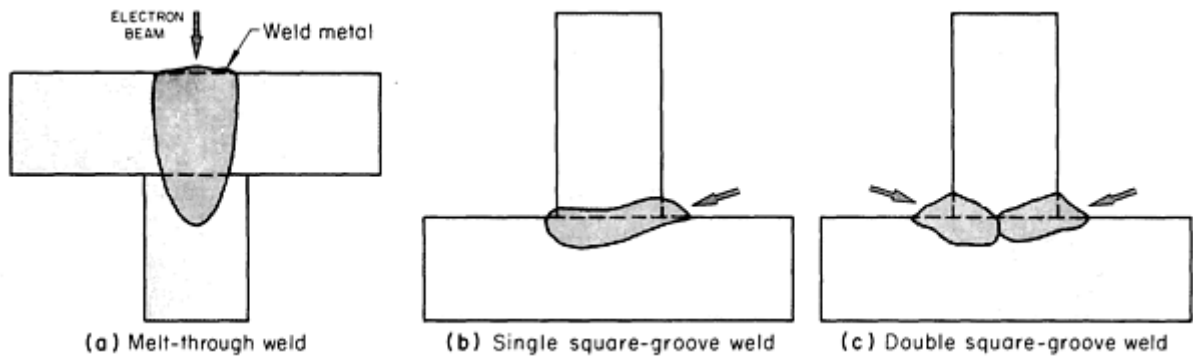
TYPICAL WELDS PRODUCED BY EBW OF T-JOINTS
